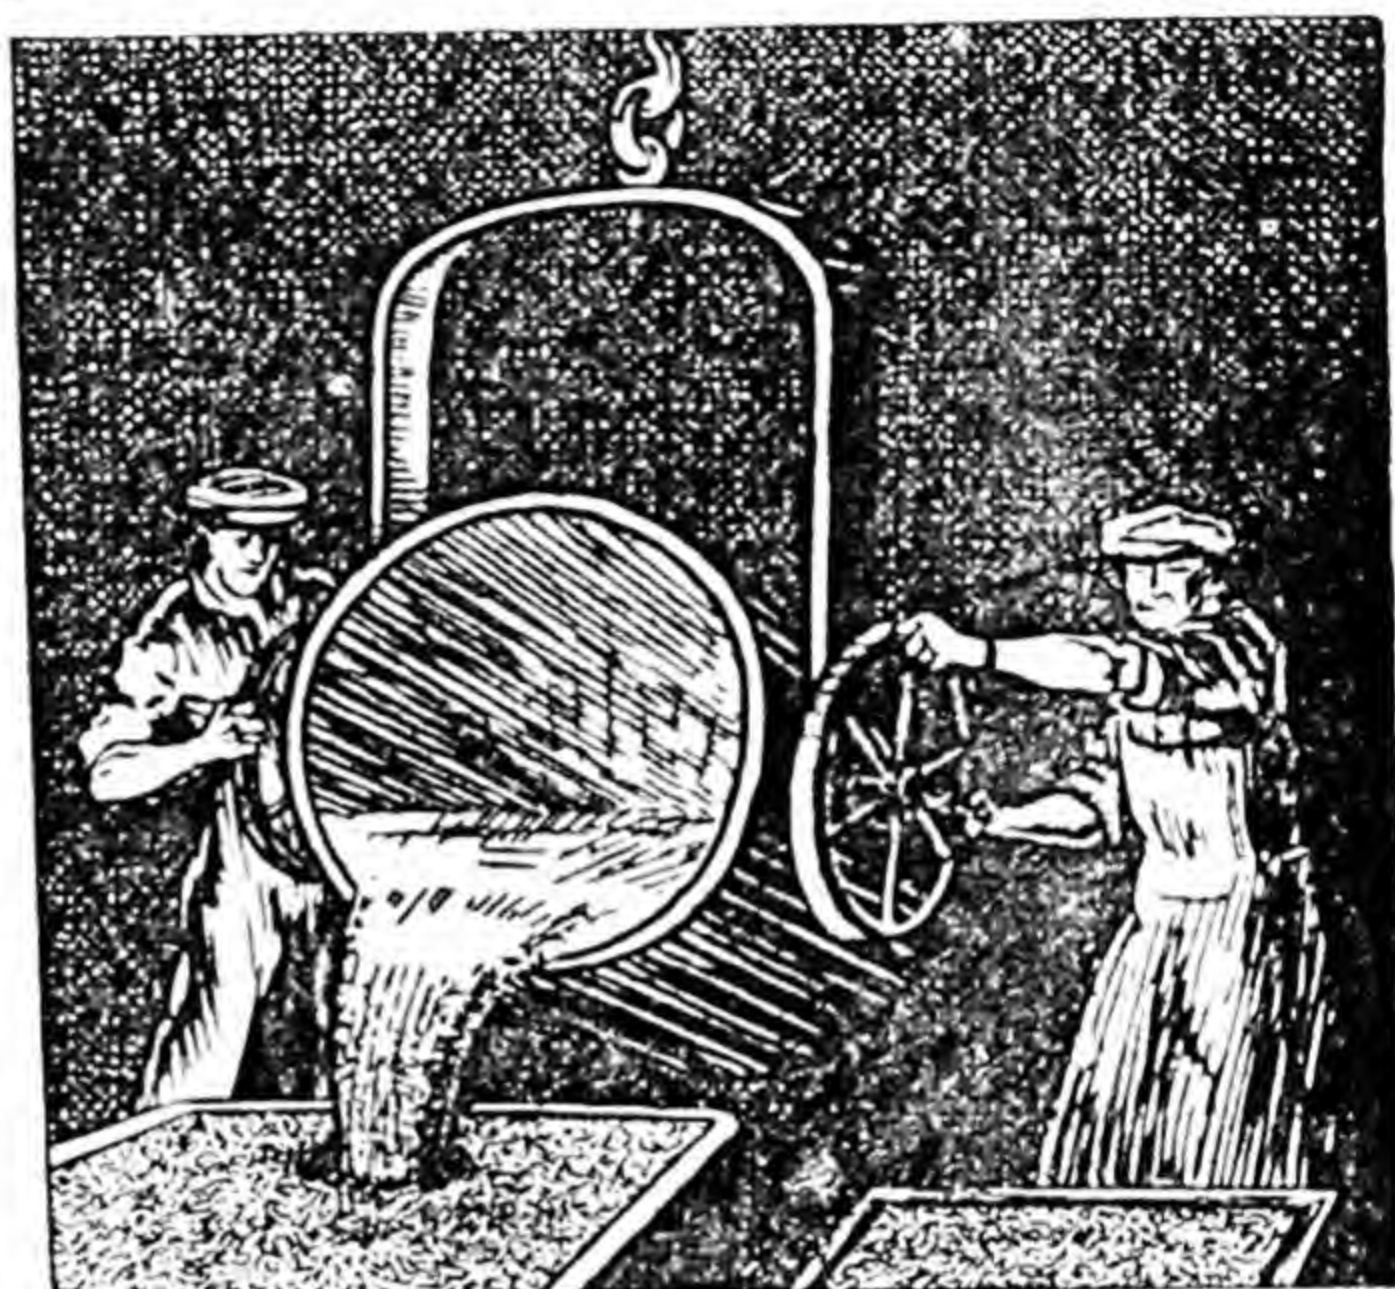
Making a large casting. The molten metal is a liquid, and is being poured out like water.
